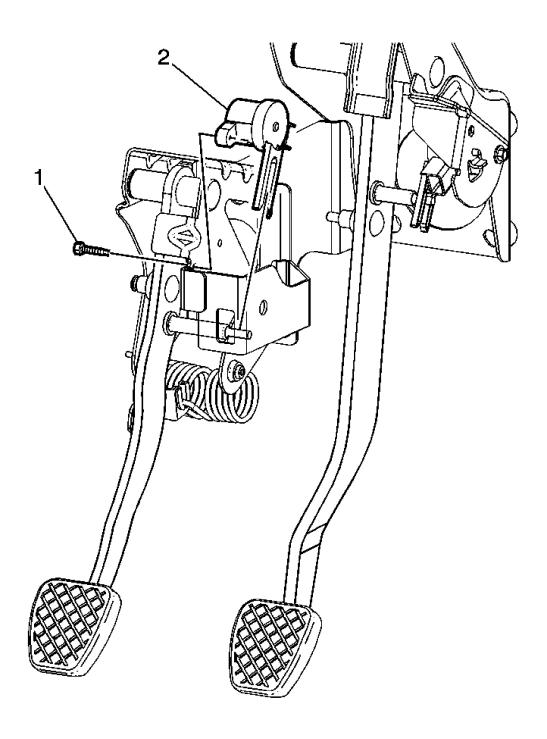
Clutch Pedal Position Sensor Courtesy of GENERAL MOTORS CORP.
